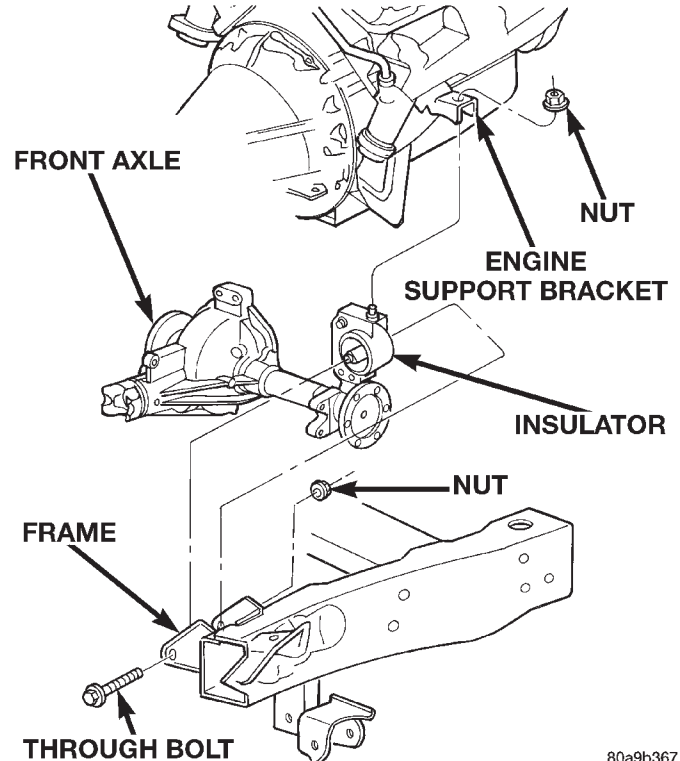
Engine Mount Insulator at Frame—4WD Vehicles
